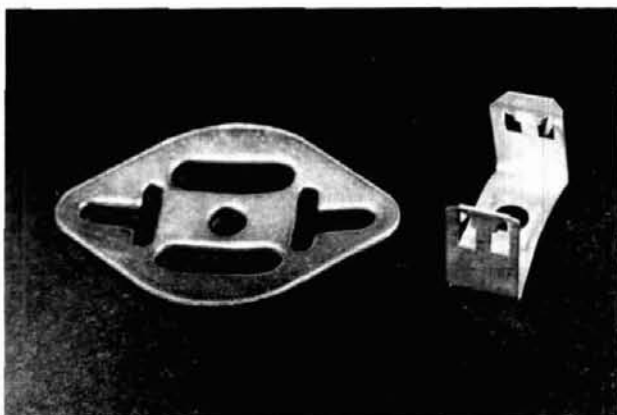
Mounting hardware for i-f transformers, which can be used to replace older 2.5-cm (1-inch) transformers.
